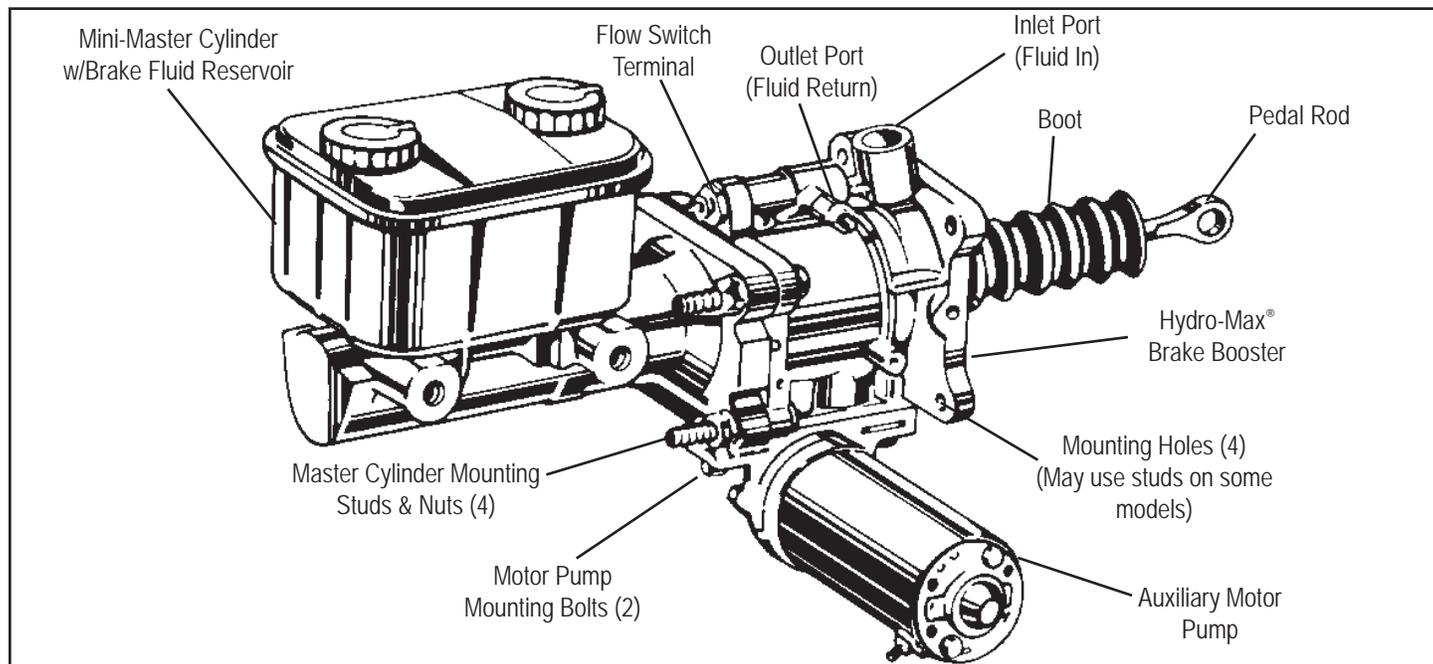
TYPICAL HYDRO-MAX® BRAKE BOOSTER AND MINI-MASTER CYLINDER ASSEMBLY
